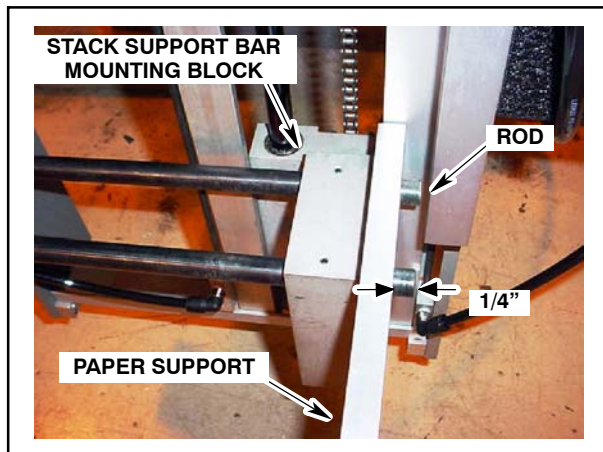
Rods Should Extend 1/4" Beyond Supports
